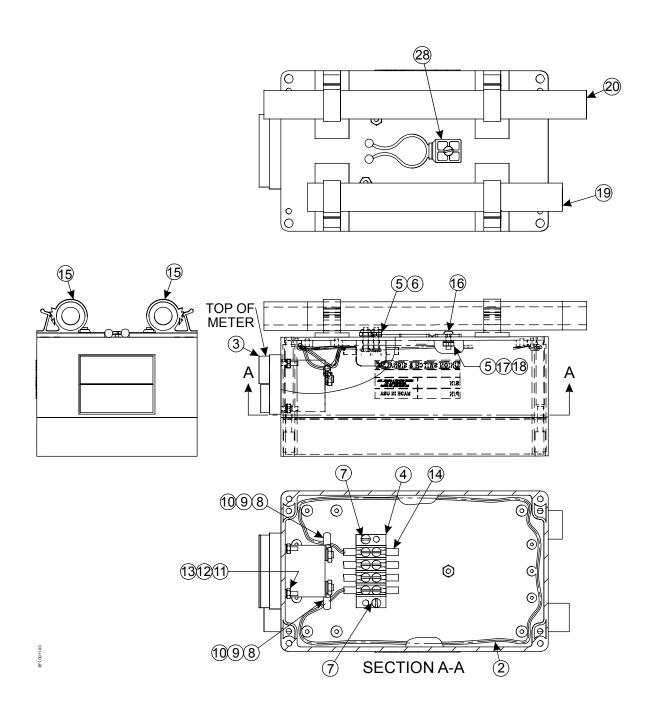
Antenna Test Box Parts (Sheet 2)
